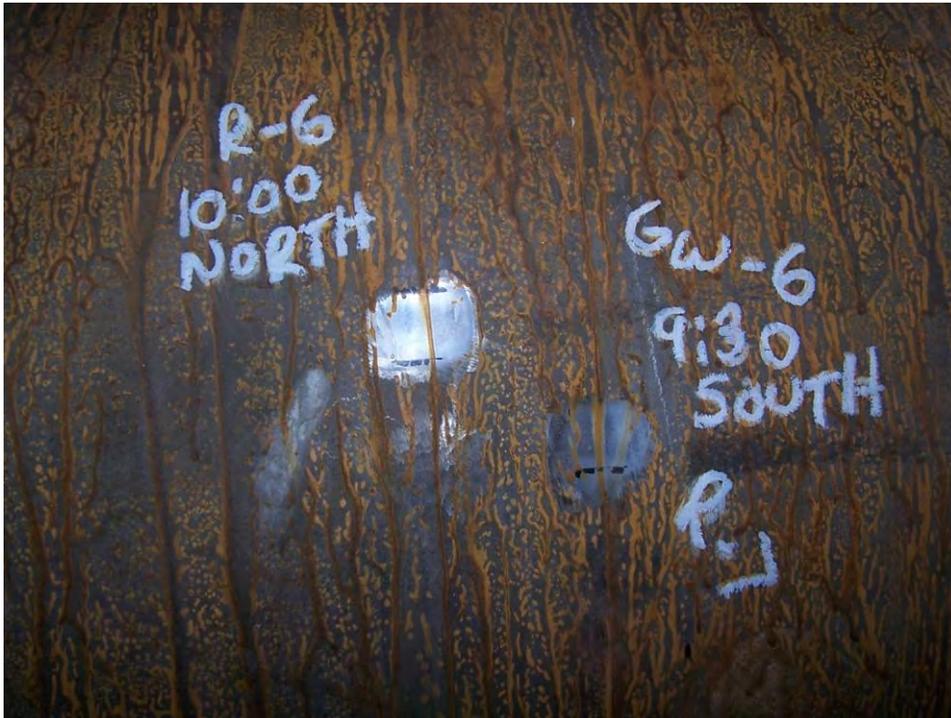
Photographs of the inspection locations on the Upper Finishing Superheater Outlet header.
